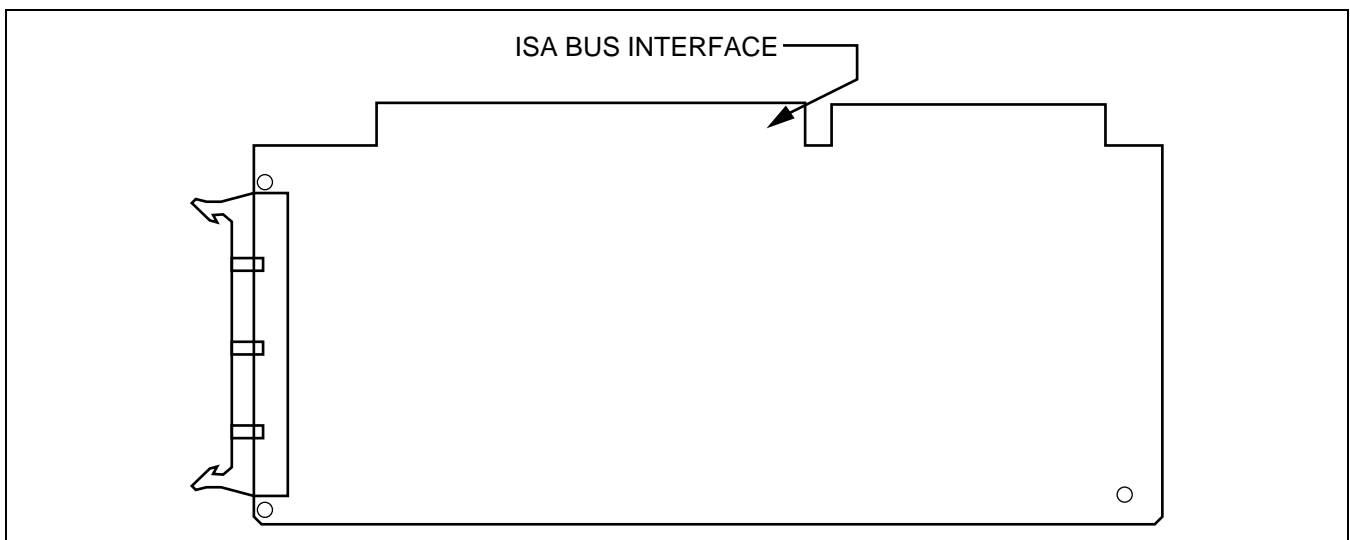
Face Layout of PZ-GT20 (ISAGT)
